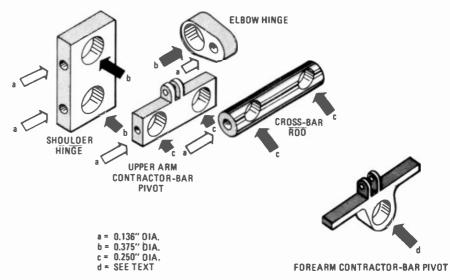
DETAILS of the aluminum parts which must be fabricated. Steel cross-bar rod is also shown as an example. Note that there are several different versions of this part.
